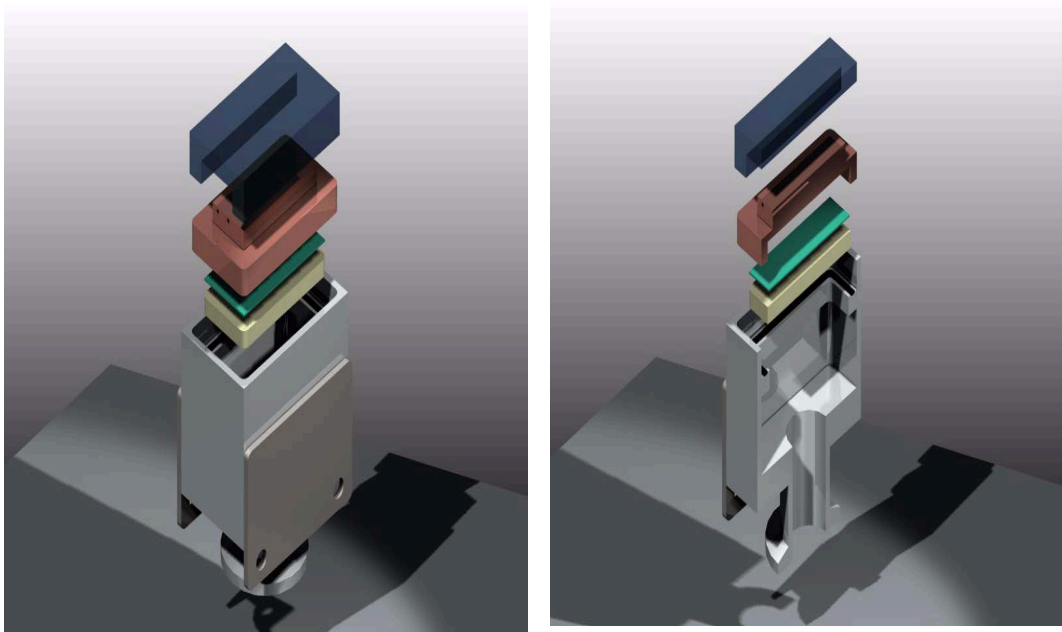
Solid view of the GAMMA 1D heater assembly.
